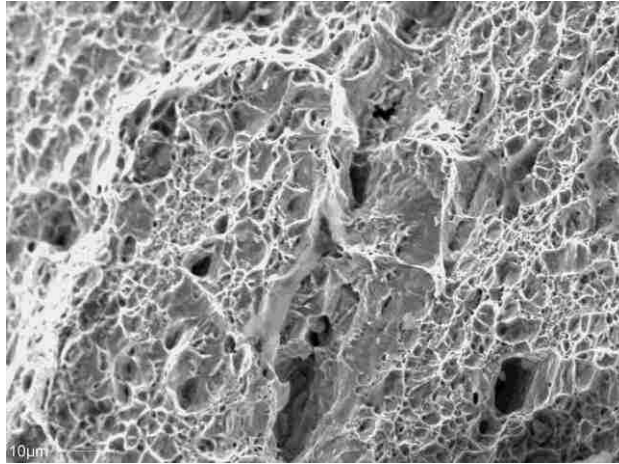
DP980 tube fracture surface showing mixed mode behaviour
